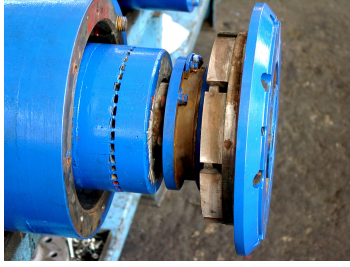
A lower bearing of prototype SAR-55/1500/09/P2
